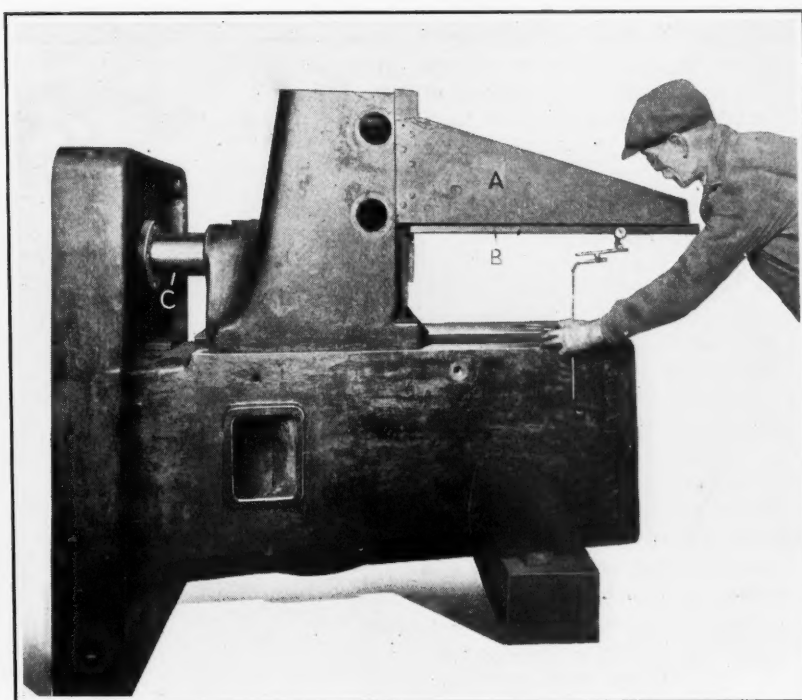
Fixture for inspecting Assembled Column and Knee
